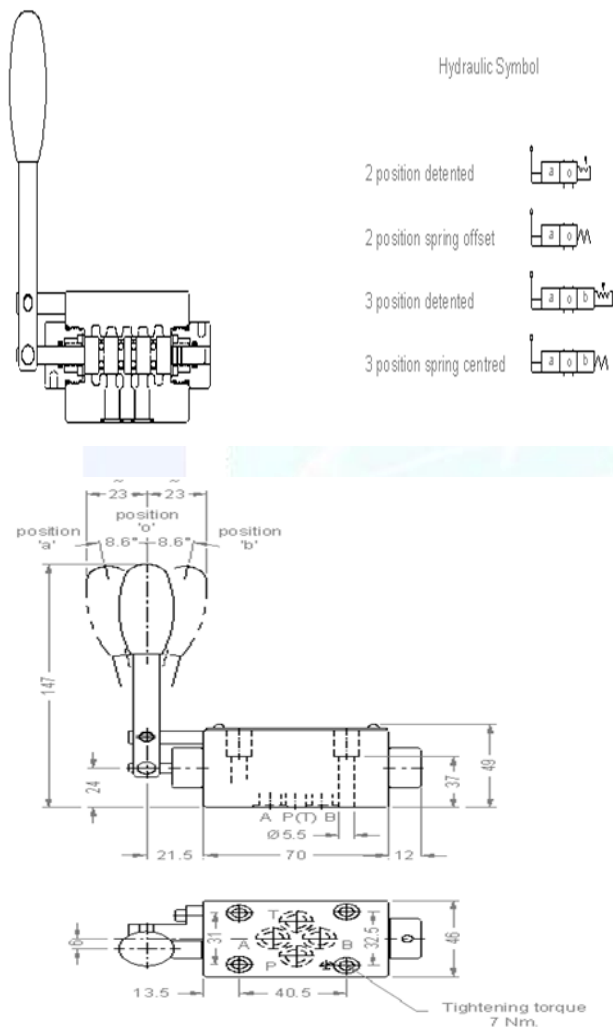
Unit Dimensions Of Sub-Plate Type Body
